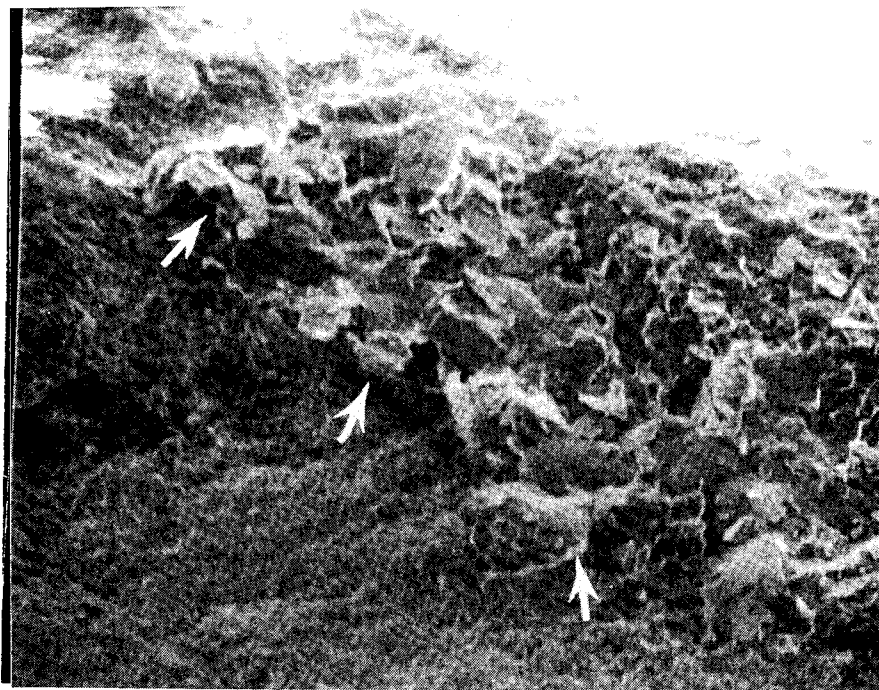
Fractography of rotating beam specimen B4 (830x)
